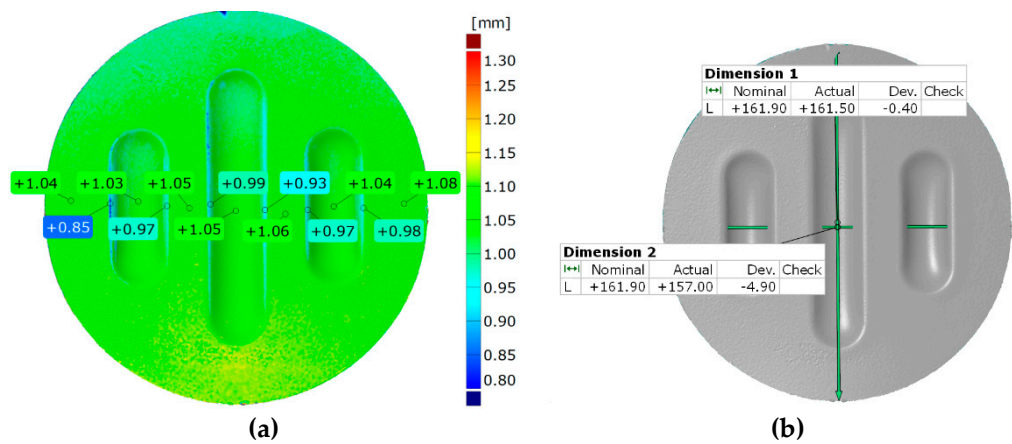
Example result of measuring (a) the thickness of the drawpiece and (b) the change in drawpiece diameter after the forming process.
